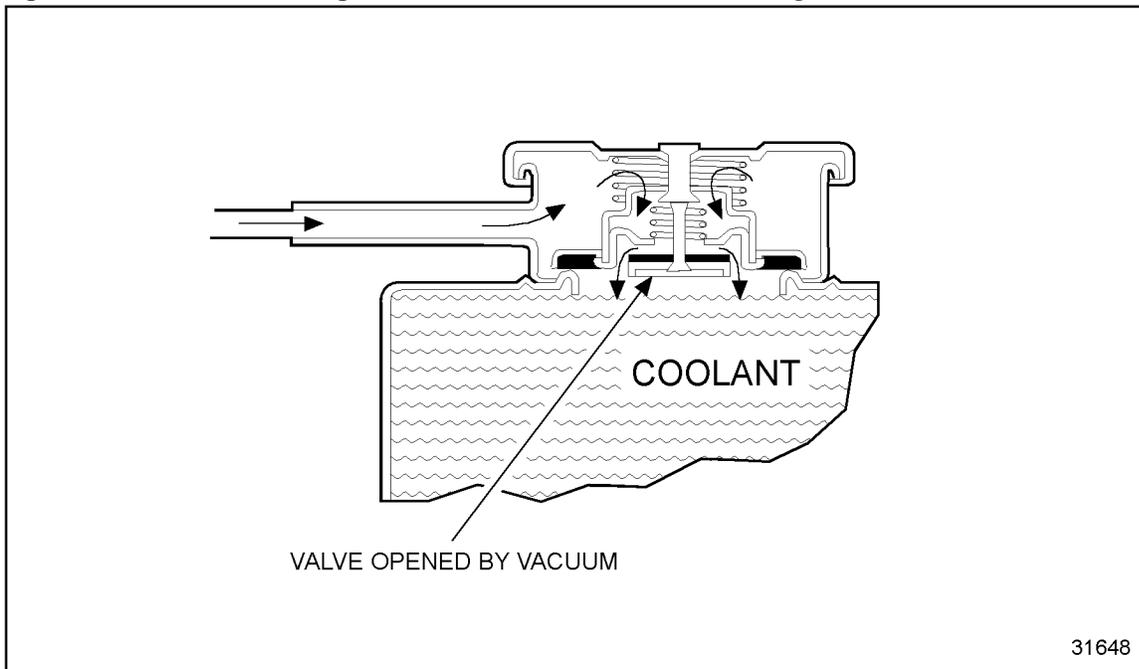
Pressure Control Cap — Vacuum Valve Open
